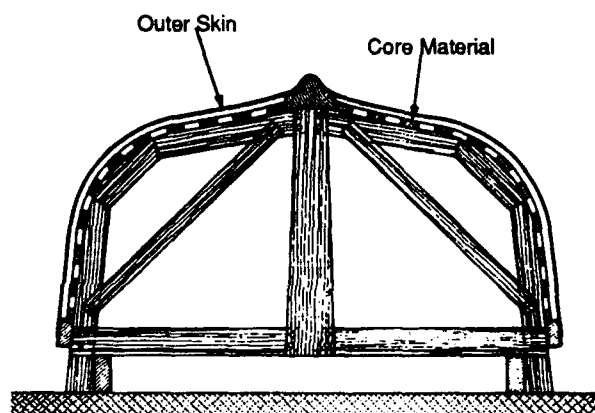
Detail of Foam Placement on Plugs Showing Both Nails from the Outside and Screws from the Inside [Johannsen, *One-Off Airex Fiberglass Sandwich Construction*]
